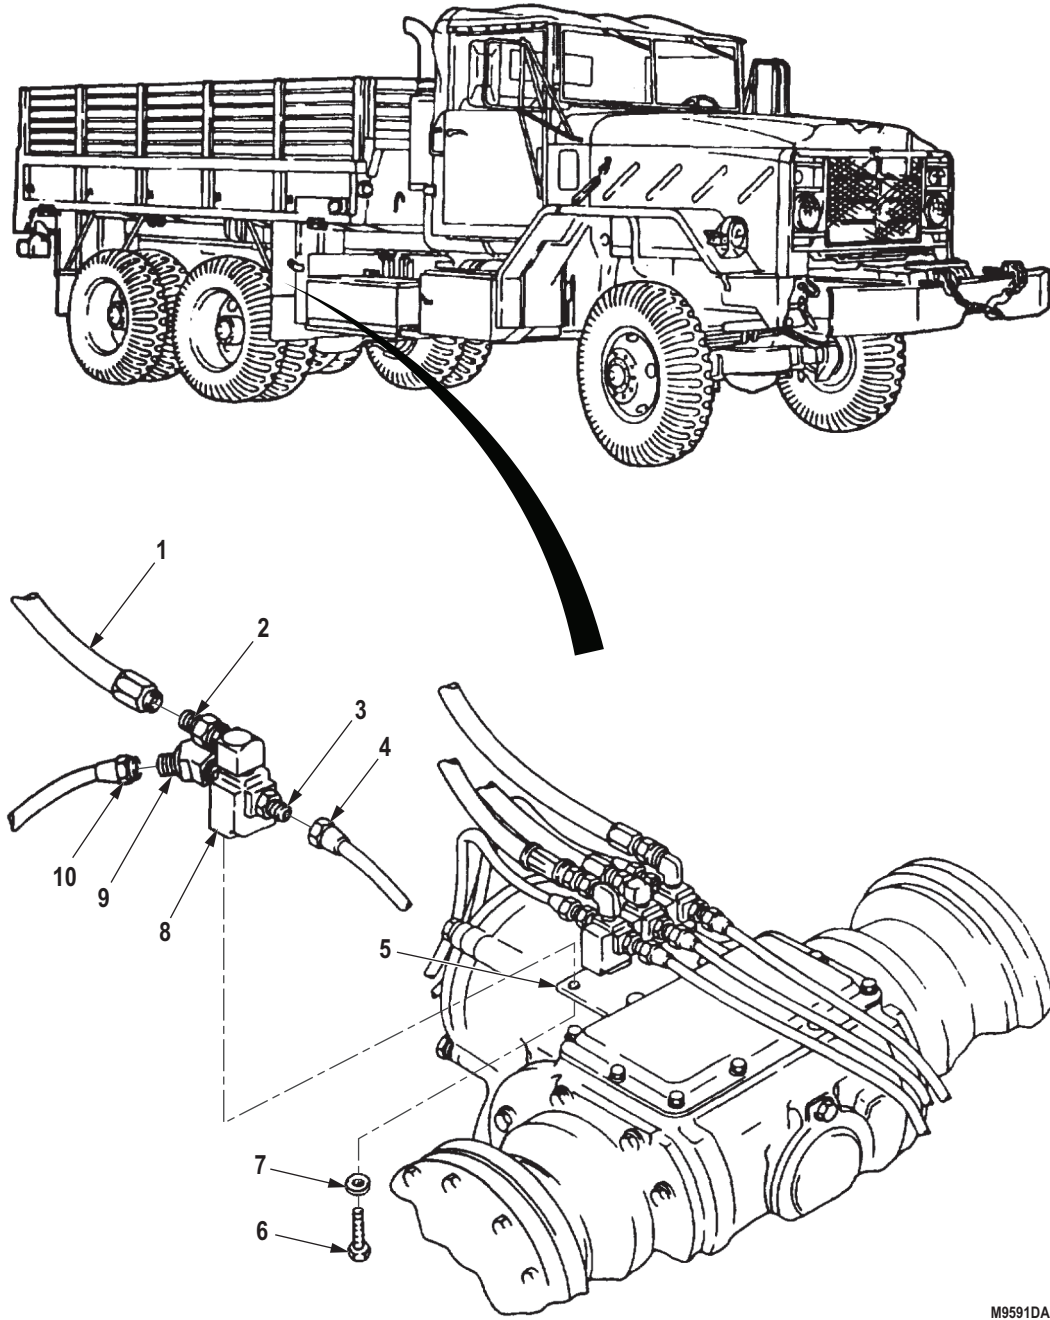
Brake Chamber Air Manifold Tee Replacement Removal.
